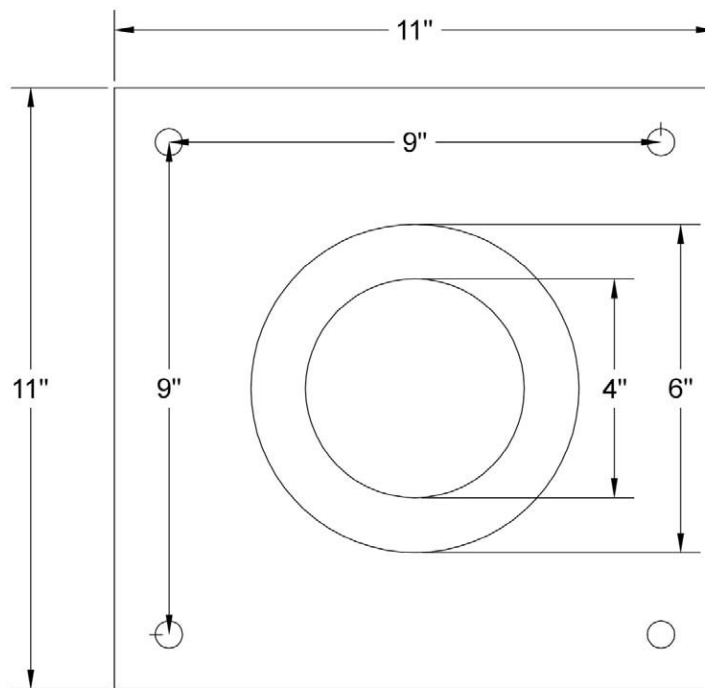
Plan View of Test Frame Base Plate with Dimensions (Seth Roswurm, 2013)
